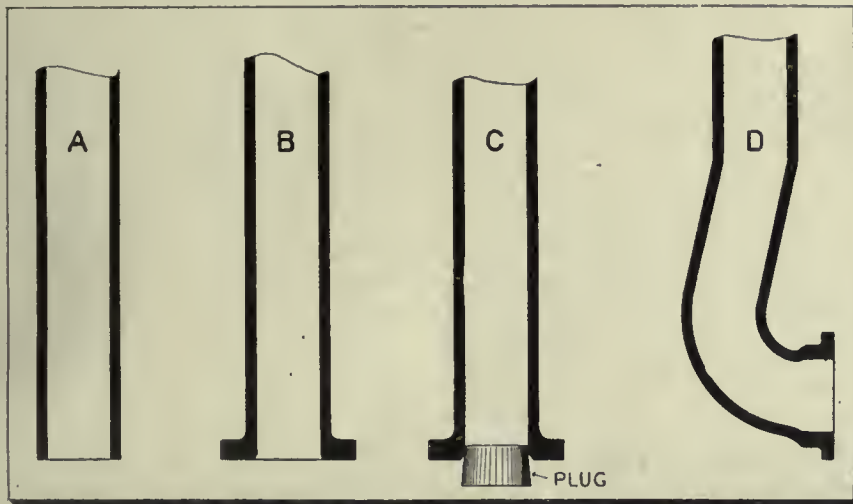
MANUFACTURE OF SUPERHEATER TUBES.
